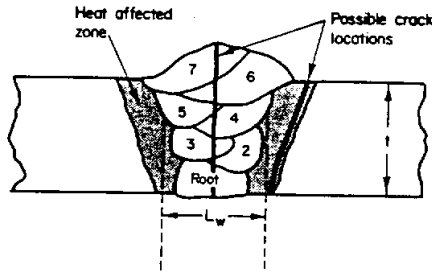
Typical butt weld sequence for a pipe and possible cracks (this is an actual sequence for a 4-in. diameter Schedule 80 pipe).
